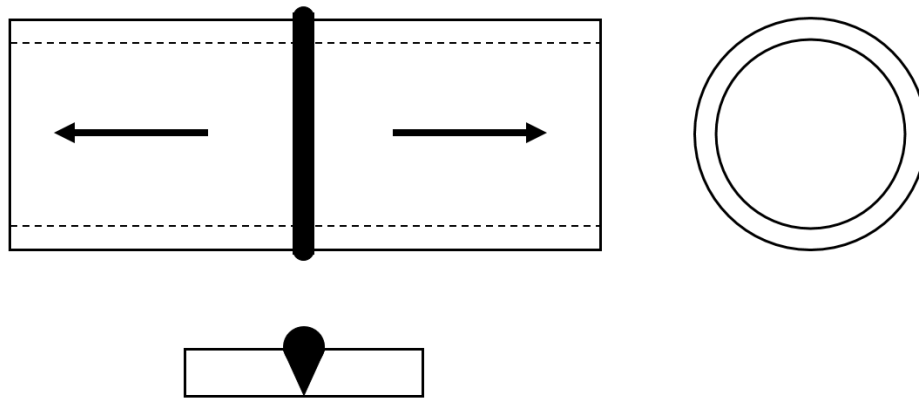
Transverse butt weld in circular hollow section, welded from one side, full penetration
